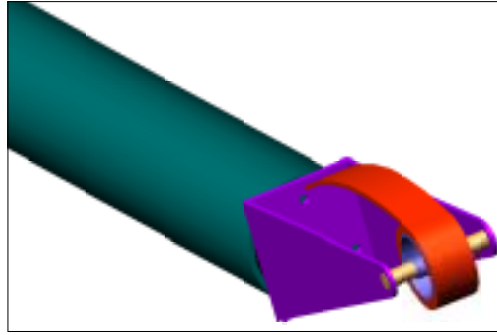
Assembly of a constant-force spring and a bracket to the crossbar.
